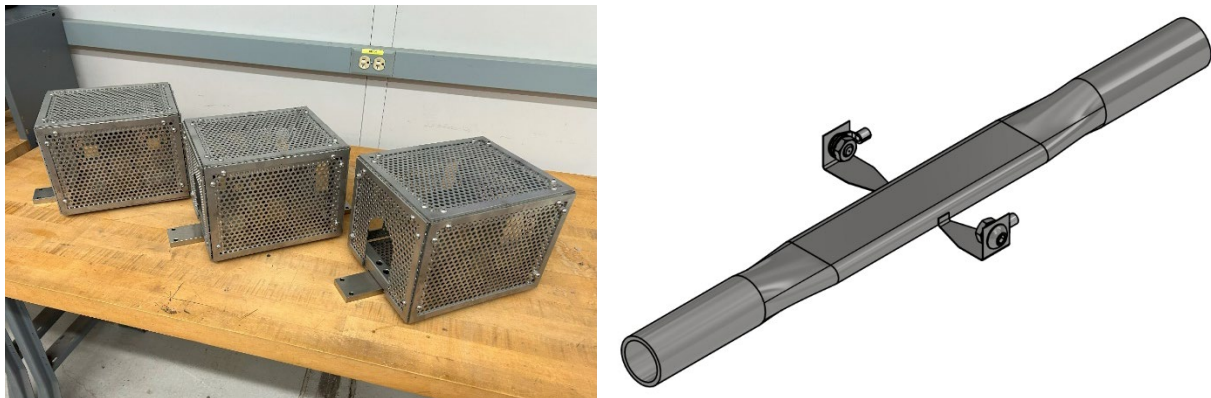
Fabricated METL EMFM MK-II enclosures (left) and 3D model of the new lead design (right). The new leads will be tack welded to the outside of the conduit using TIG welding which will result in a more robust fixturing of the leads.
